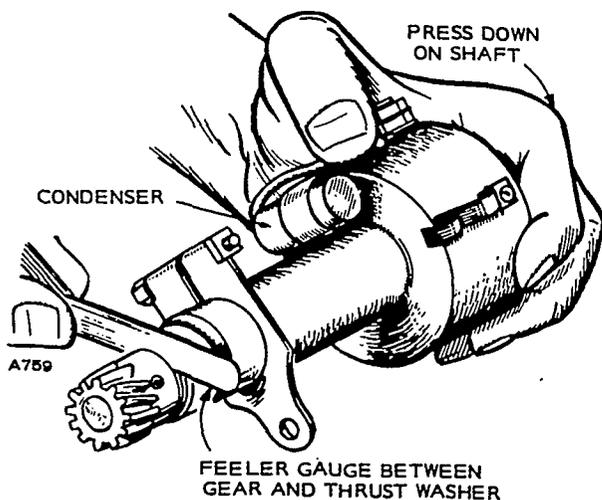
CHECKING DRIVE SHAFT END PLAY
